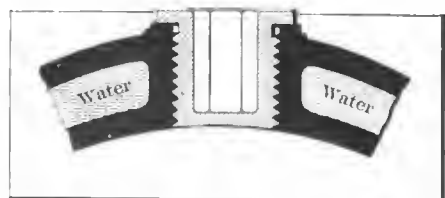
More perfect design with enough thread on plug to abort stripping.
